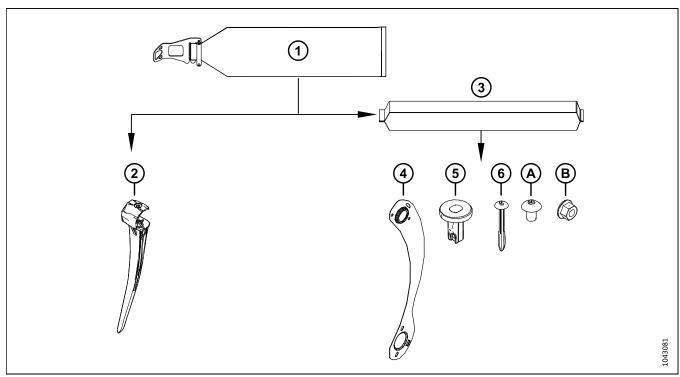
Center Reel Parts Retrieved from Parts Bag MD #368324
